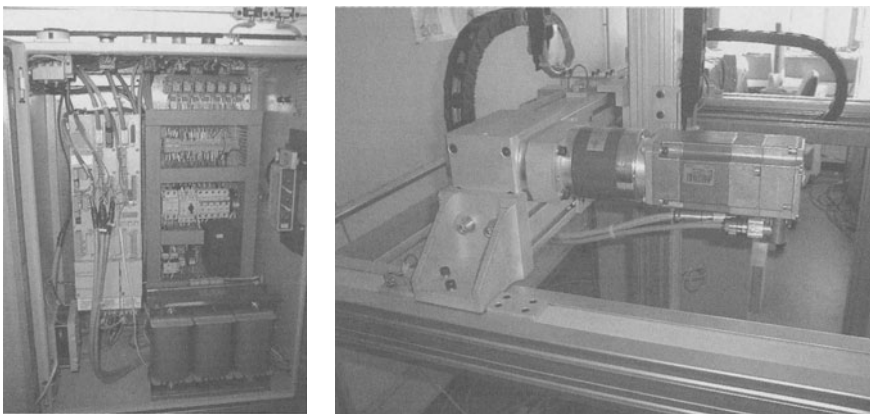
Electrical equipment (left) and Y-axis gearbox and motor close-up (right)
